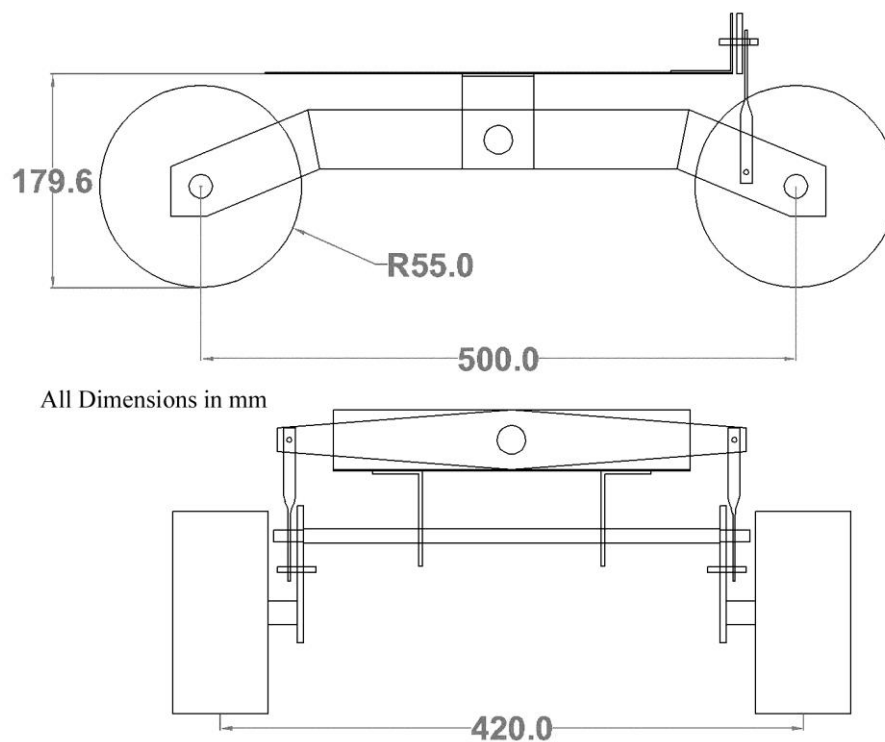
Basic Dimensions of the Mobile Robotic Platform
